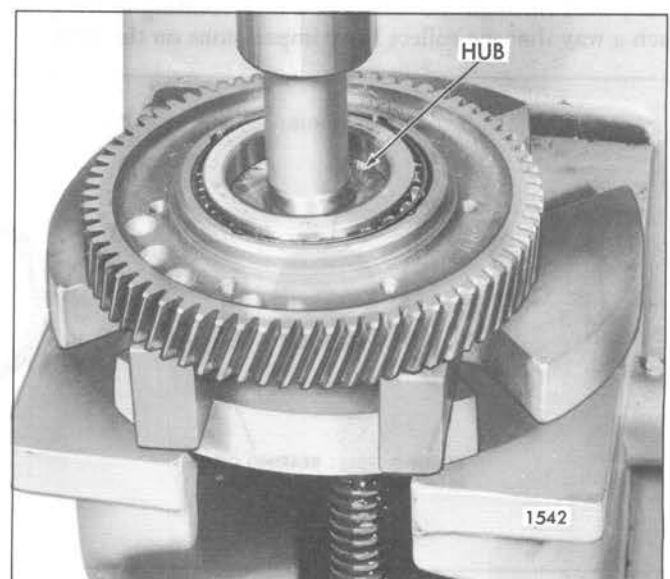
Pressing Hub Out of Idler Gear Bearing
